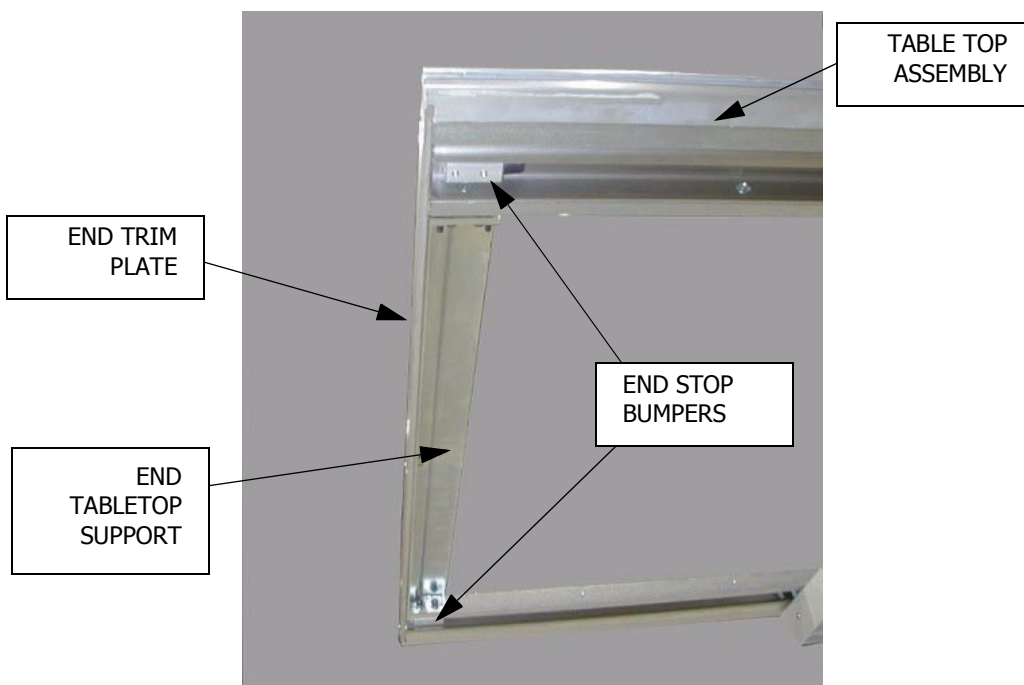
Table Top End Trim Plate and End Stop Bumpers
